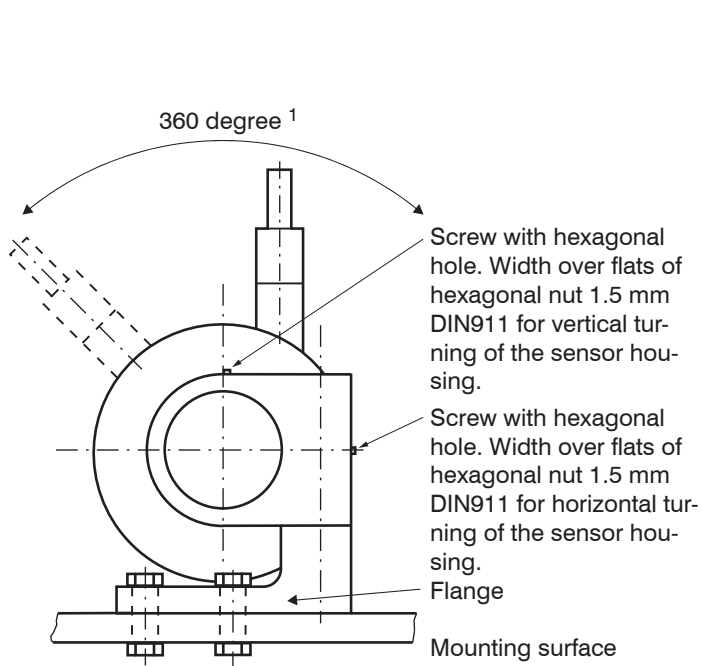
Sensor mounting and vertical turning of the sensor housing
